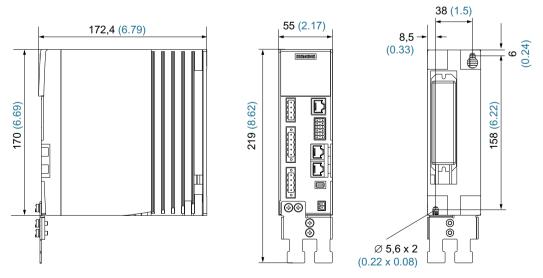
Dimension drawing SINAMICS S210 FSB, dimensions in mm (inches)
